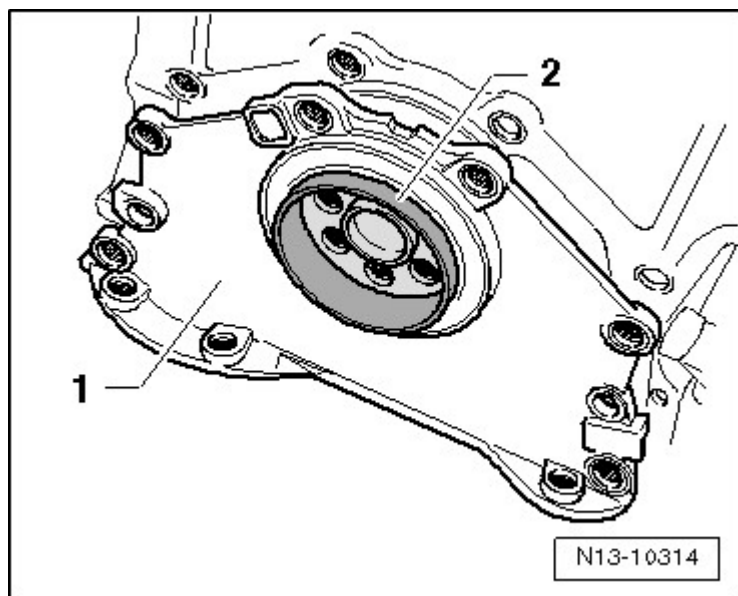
Identifying Sealing Flange & Seal Guide Sleeve
